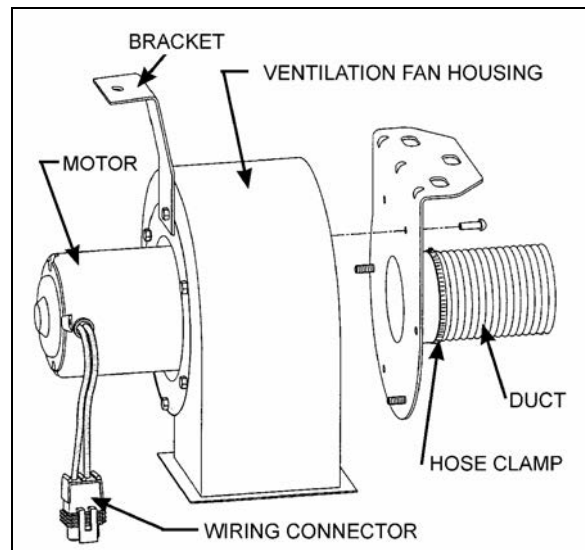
VENTILATION FAN INSTALLATION 23222
